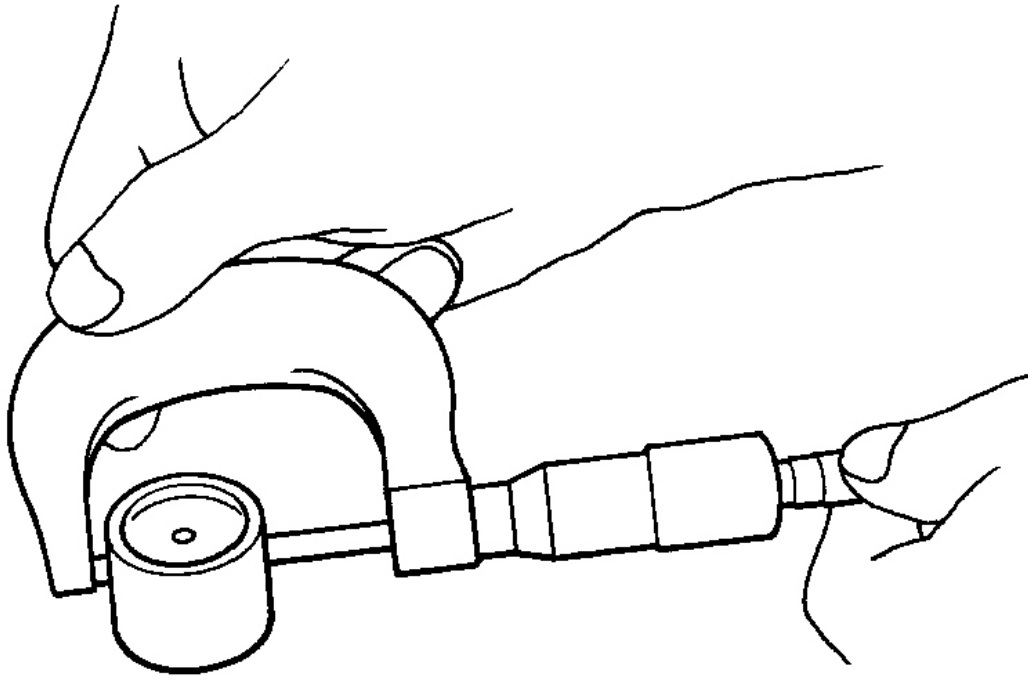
Replacing Valve Lifter And Adjusting Shim
